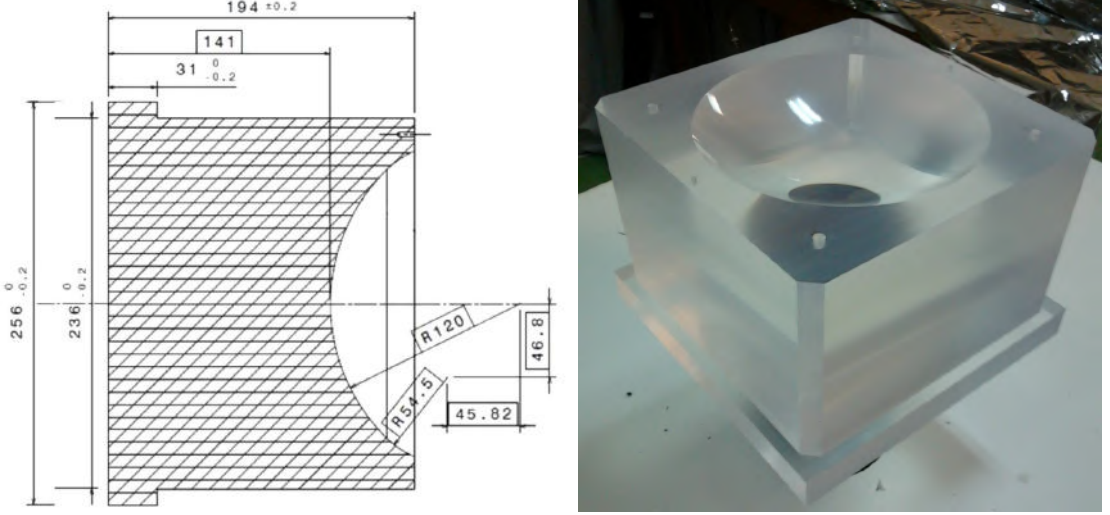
Geometry of a polystyrene cuboid scintillator block designed for the SuperNEMO demonstrator. The polystyrene is hollowed out to receive the photomultiplier bulb.
